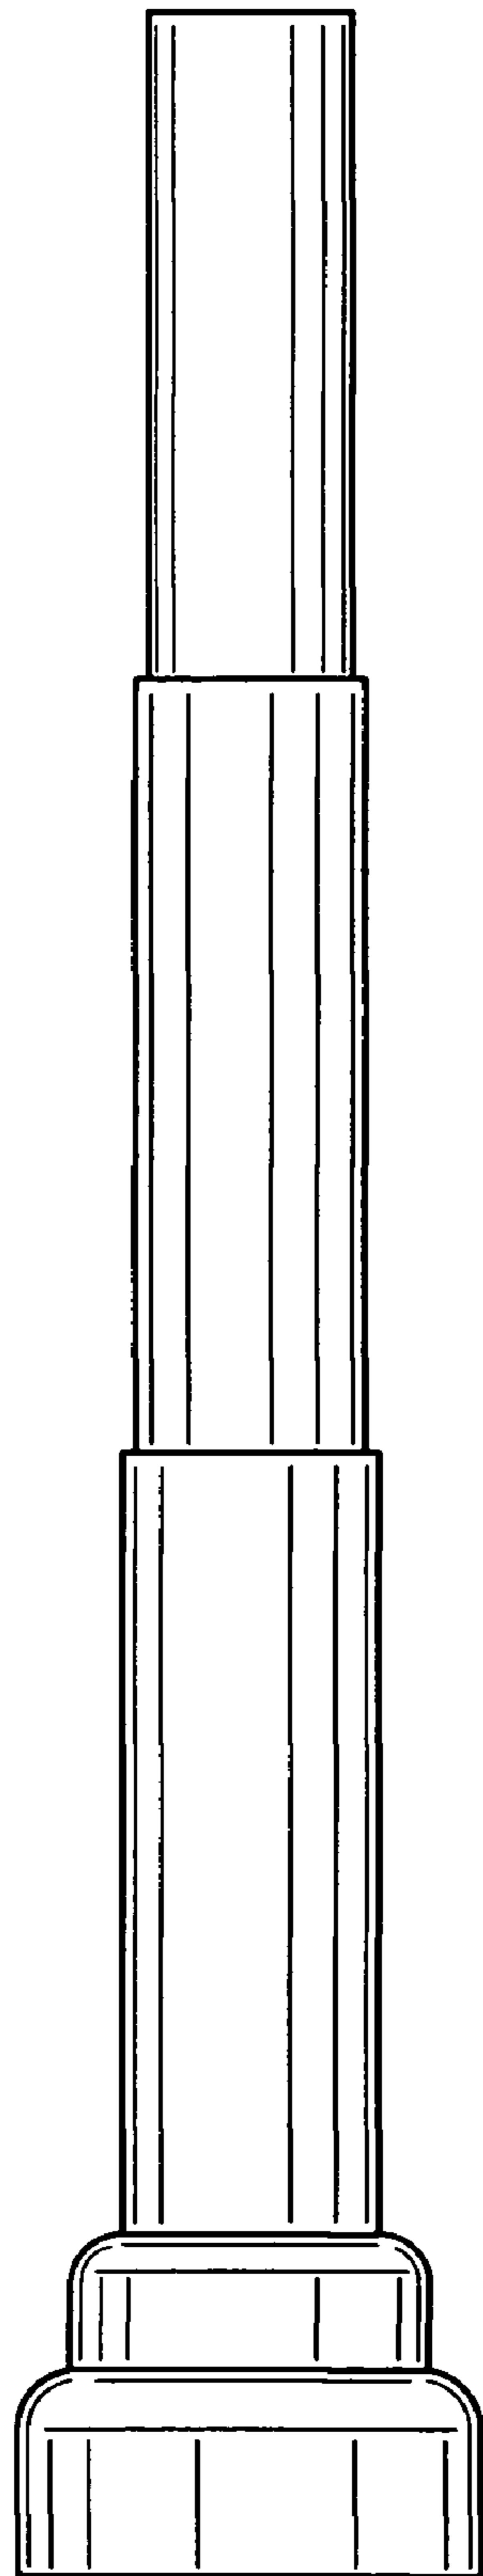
is a perspective view of a vacuum sweeper accessory nozzle showing my new design;
